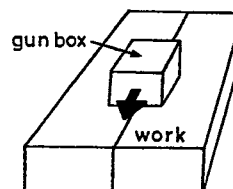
Schematic drawing of movable chamber type EB welding machine [23]
